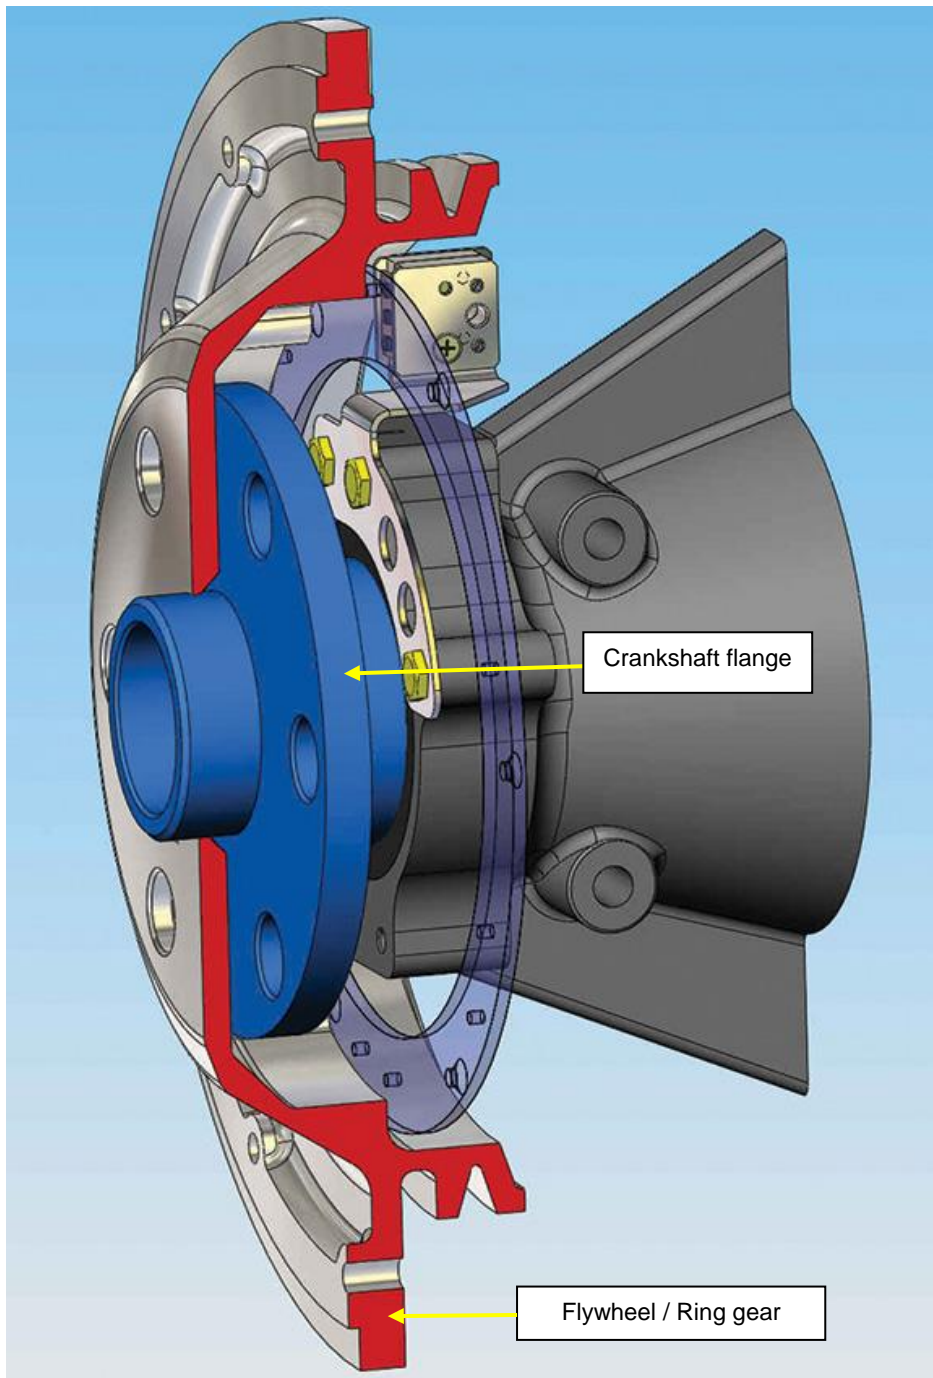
A cutaway drawing of the crankshaft flange and the flywheel/ring gear.
